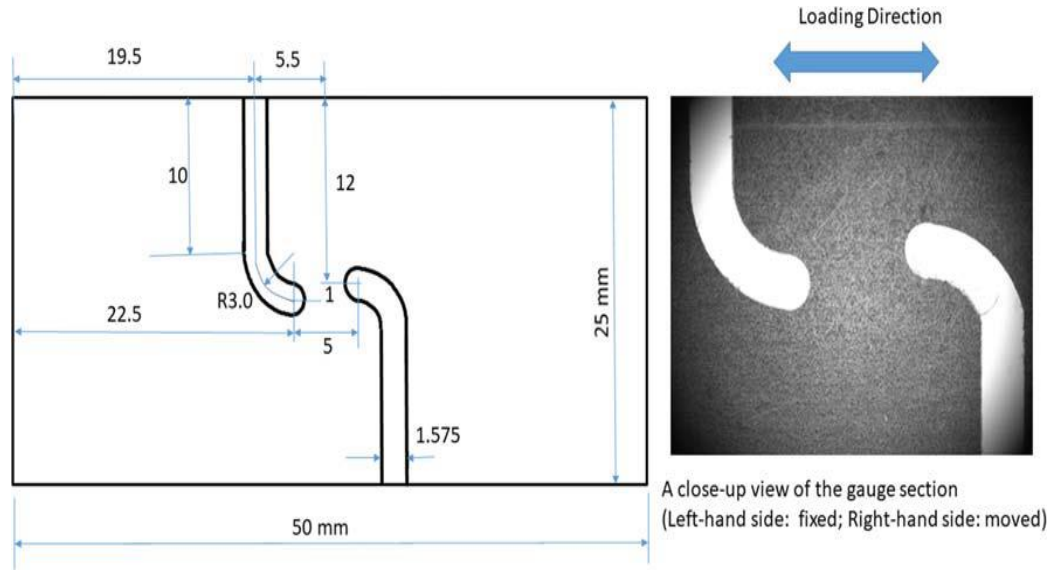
Dimensions of Type-A shearing test coupon and a close-up view image of an as-machined AA6111-T4 sheet sample with a thickness of 1.2mm.
